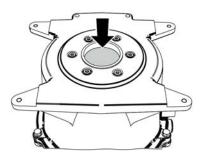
Greasing and cleaning the inside-cone cast-resin bush
